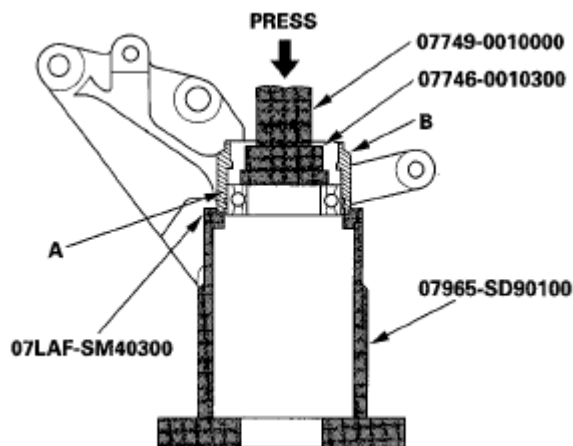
Pressing Intermediate Shaft Bearing Of Bearing Support
